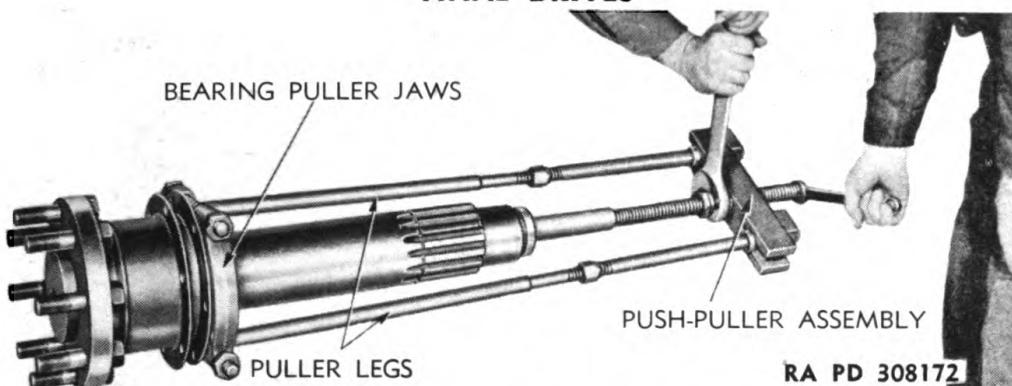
Removing Inner Sprocket Shaft Bearing, Using Adapter (A-347829) and Puller (41-P-2957-100)
